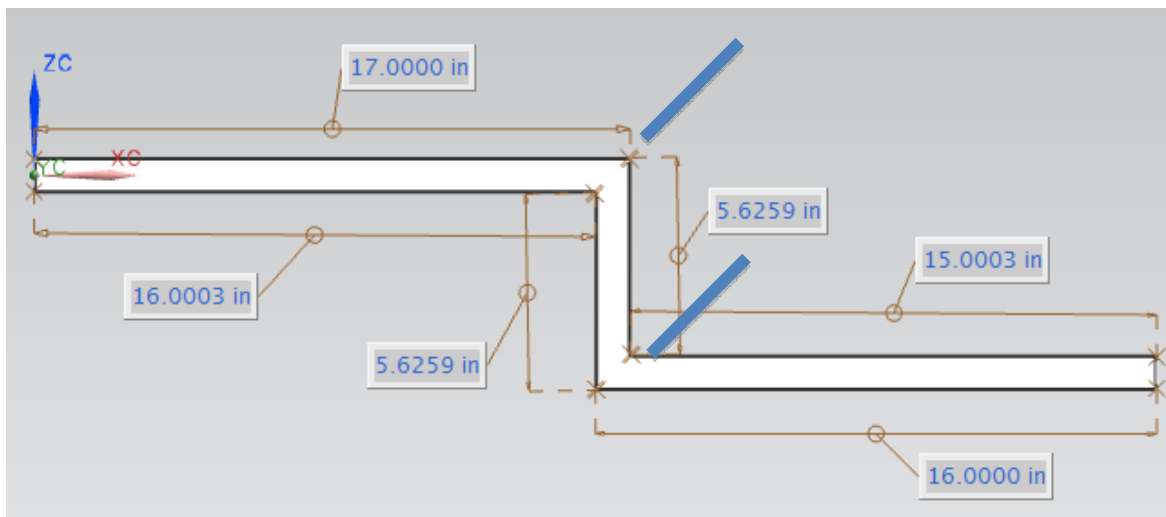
Treadle Arm diagram showing initial cuts and final assembly
